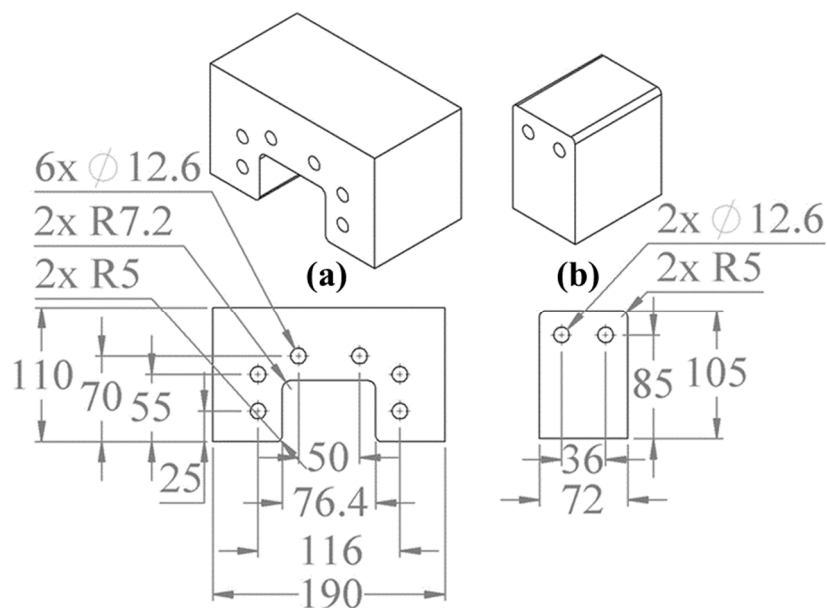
Schematic diagram of U-Shaped forming toolset (dimensions are in mm).
